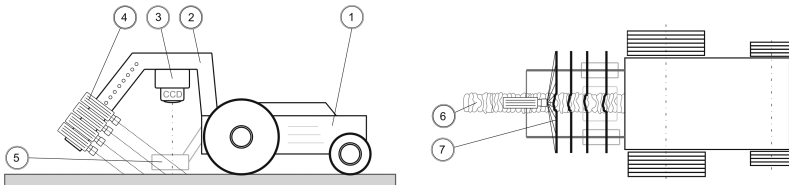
Optical system configuration: 1 – robot, 2 – front frame, 3 – CCD camera, 4 – laser generators, 5 – measurement head, 6 – weld, 7 – laser lines
